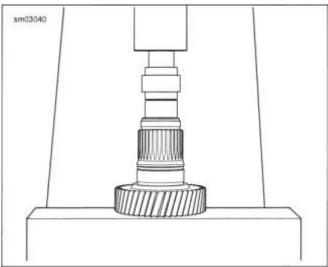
Installing Outer Needle Bearing in Main Drive Gear
